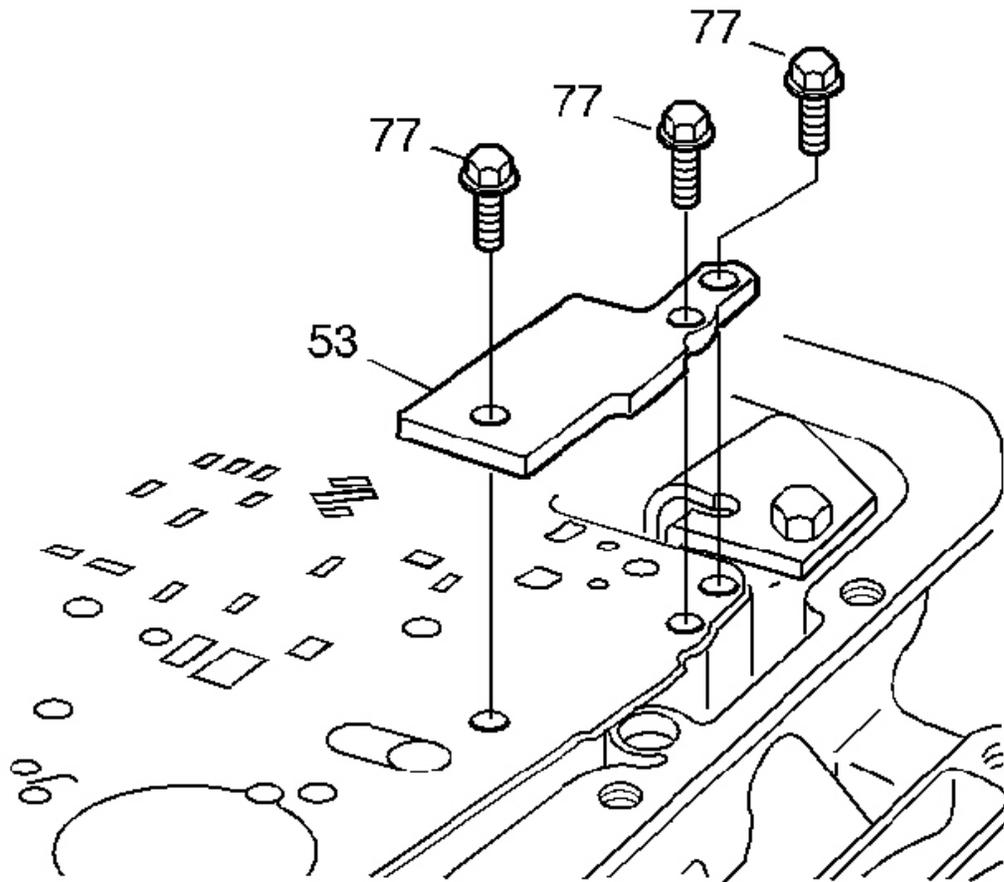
Installing Spacer Plate Support Plate & Bolts
